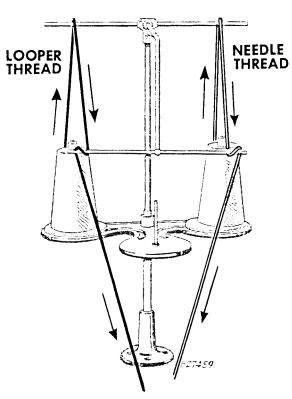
Unwinder 151031 Threaded for Two-Thread Stitch
